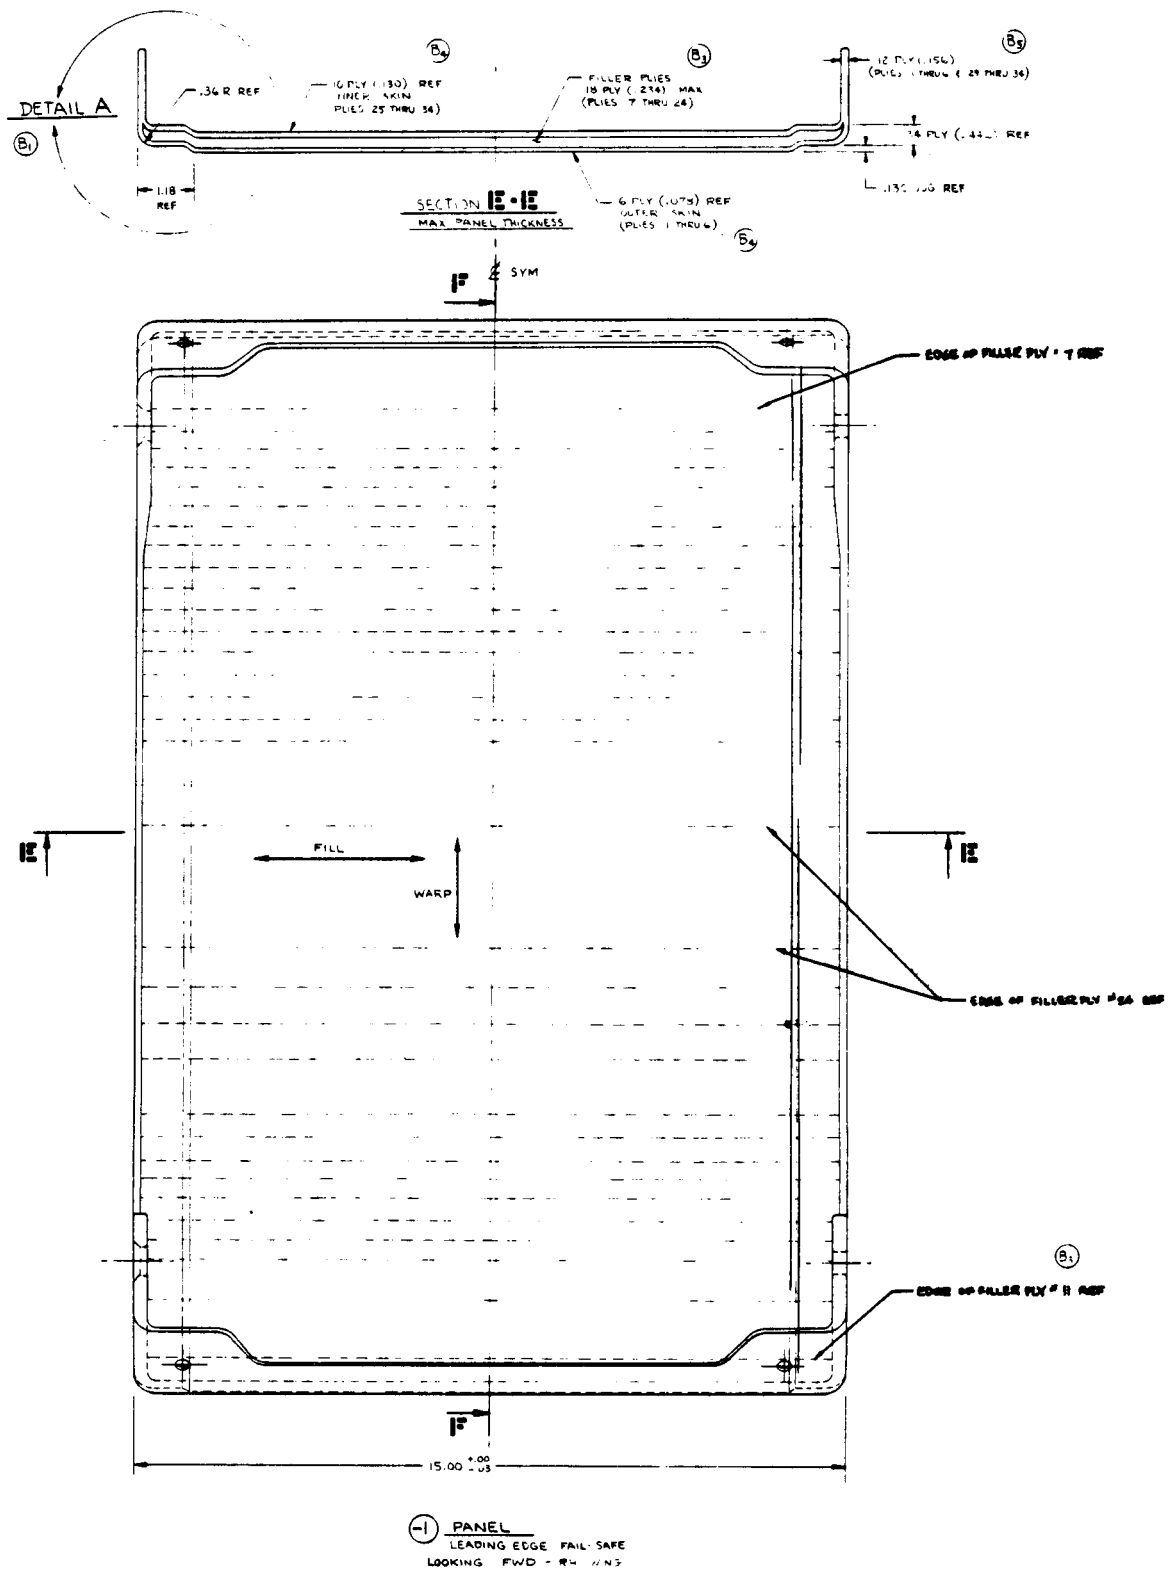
RPP PANEL ASSEMBLY — FAIL SAFE WING LEADING EDGE
